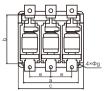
CKJ5-400 Appearance and Installation Dimensions
